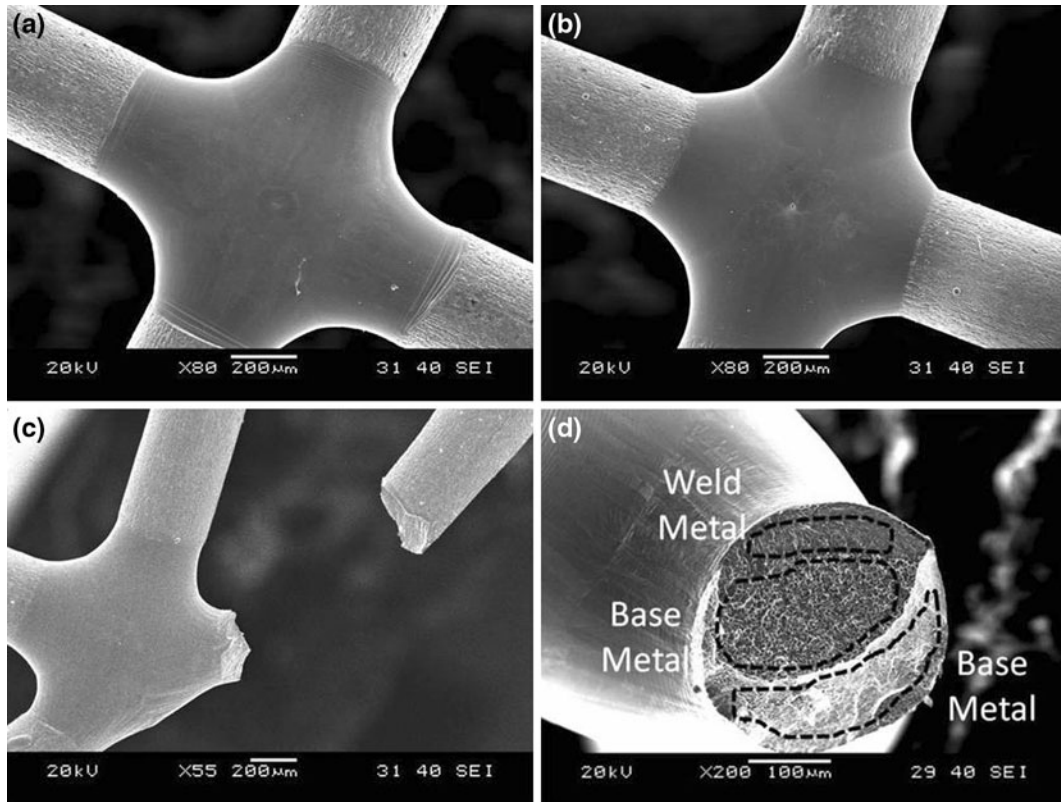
SEM images of welds made at 1.0 kW peak power for the (a) weld top, (b) weld bottom, (c) fractured weld, and (d) fracture surface.
